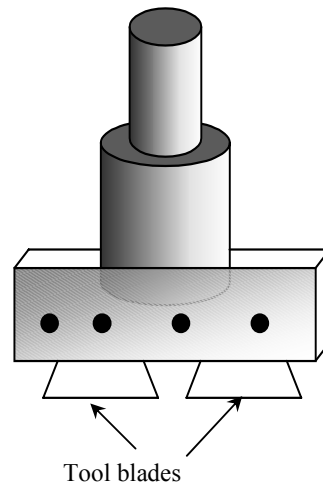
(a). Cutting jig that was tested for making edge notches on DENT samples
